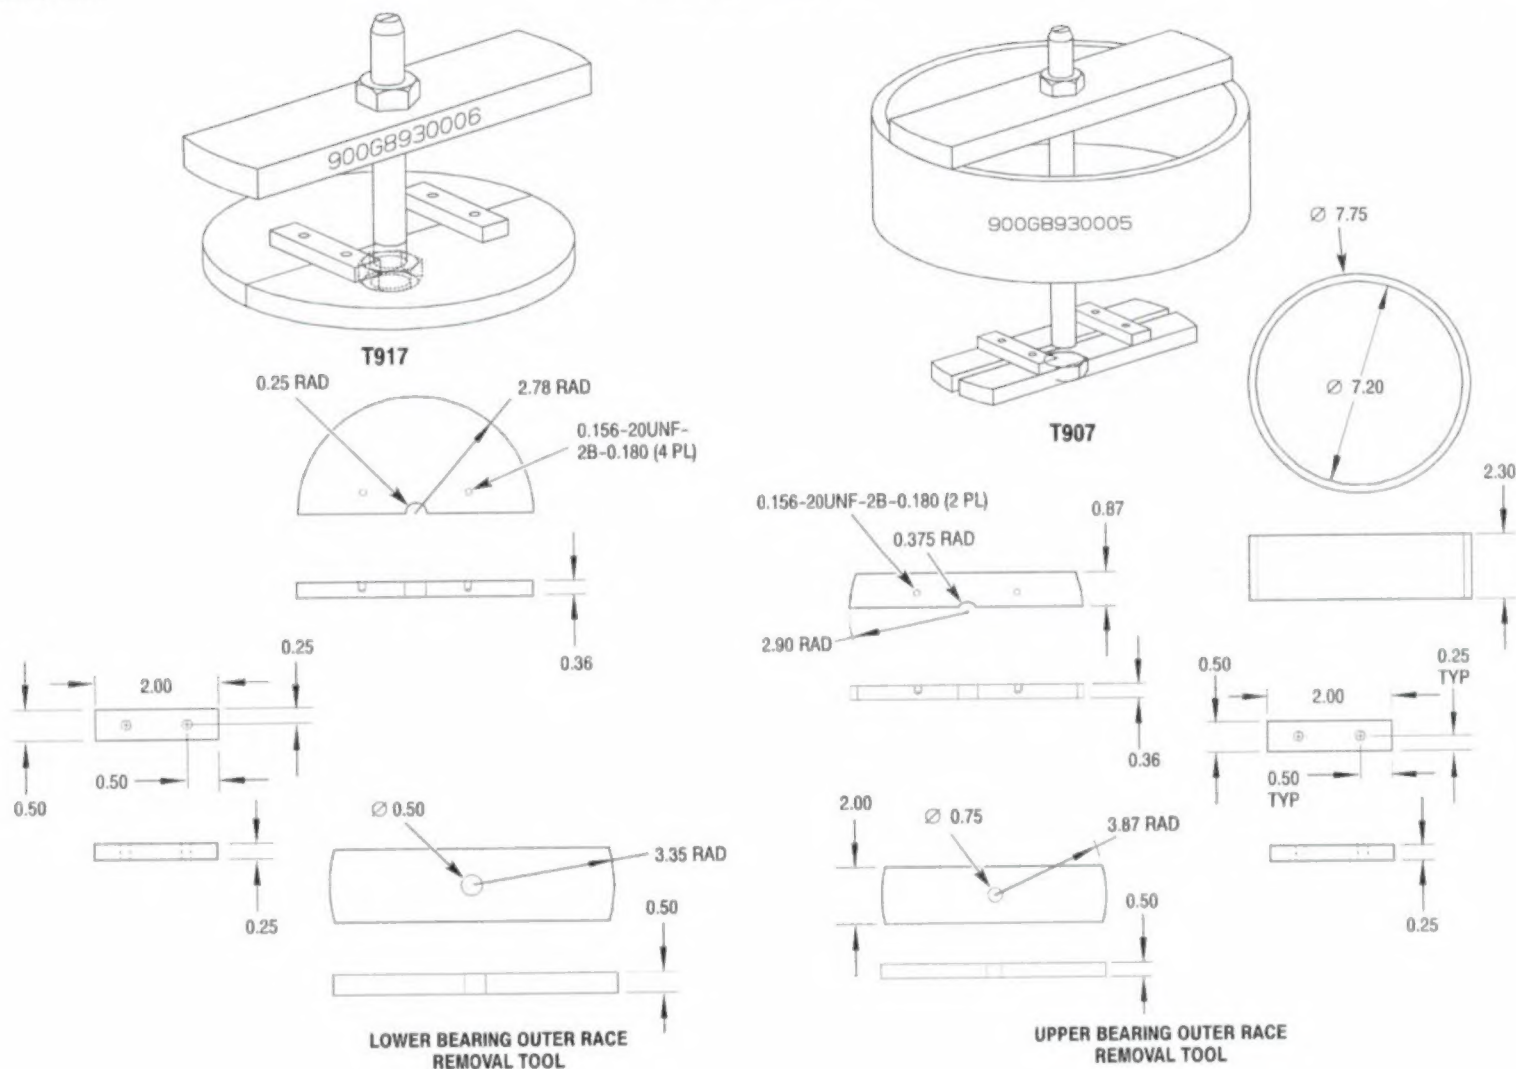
Main Rotor Hub Details – Removal / Installation Tools (Sheet 2 of 3)
